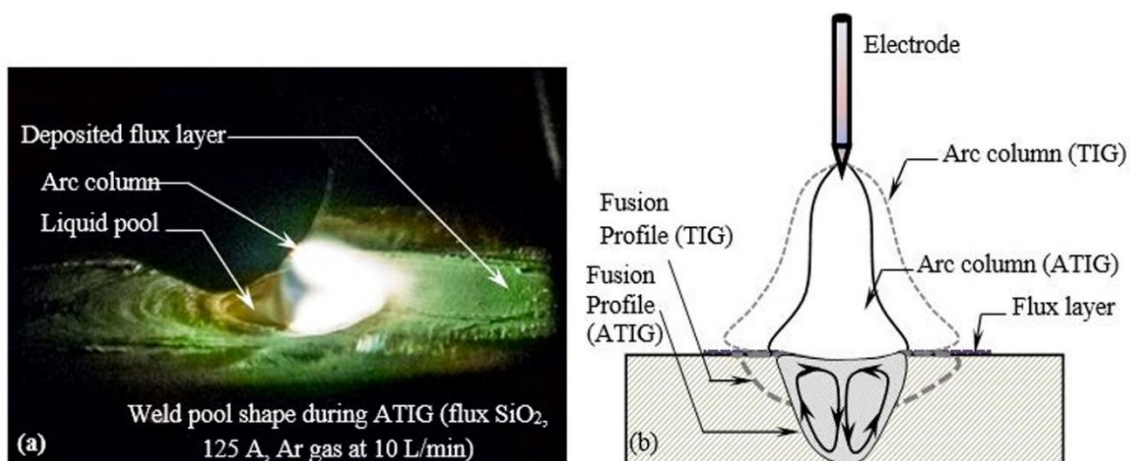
(a) Weld pool shape and (b) schematic illustration of flow in ATIG welding [9]
